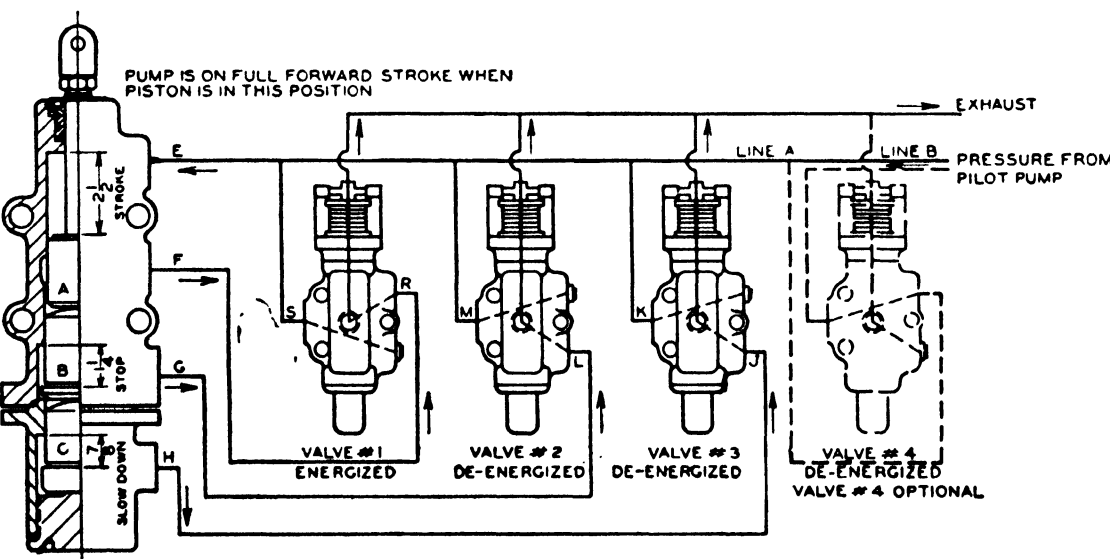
Hydraulic control operator and pilot valves. (*The Hydraulic Press Mfg. Co., Mount Gilead, Ohio.*)
